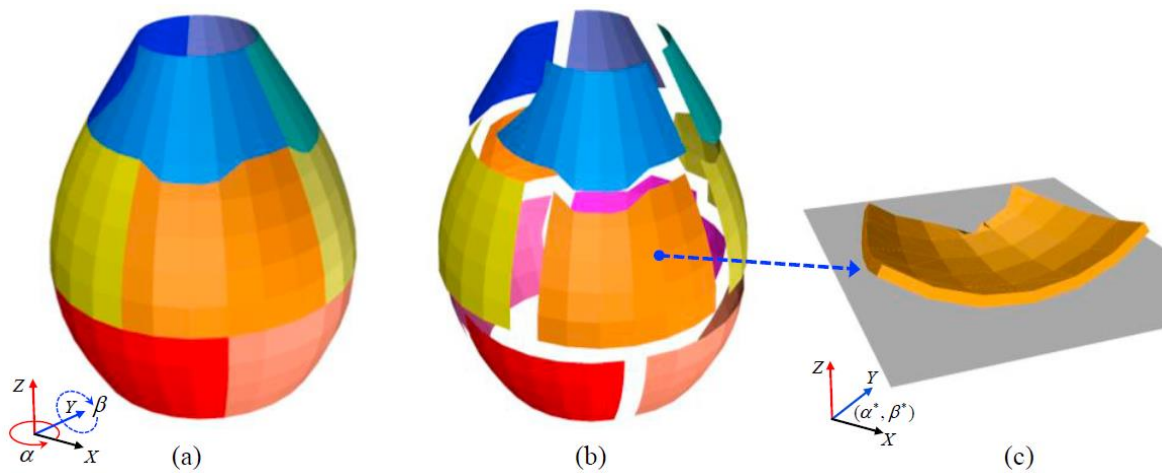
Large object desired to be additive manufactured using a 3D printer (a) segmented object, (b) exploded view, (c) reorientation of specific part for manufacturing on a print bed [19]
